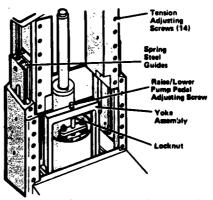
SUPERSTRUCTURE AND PUMP ASSEMBLY.
